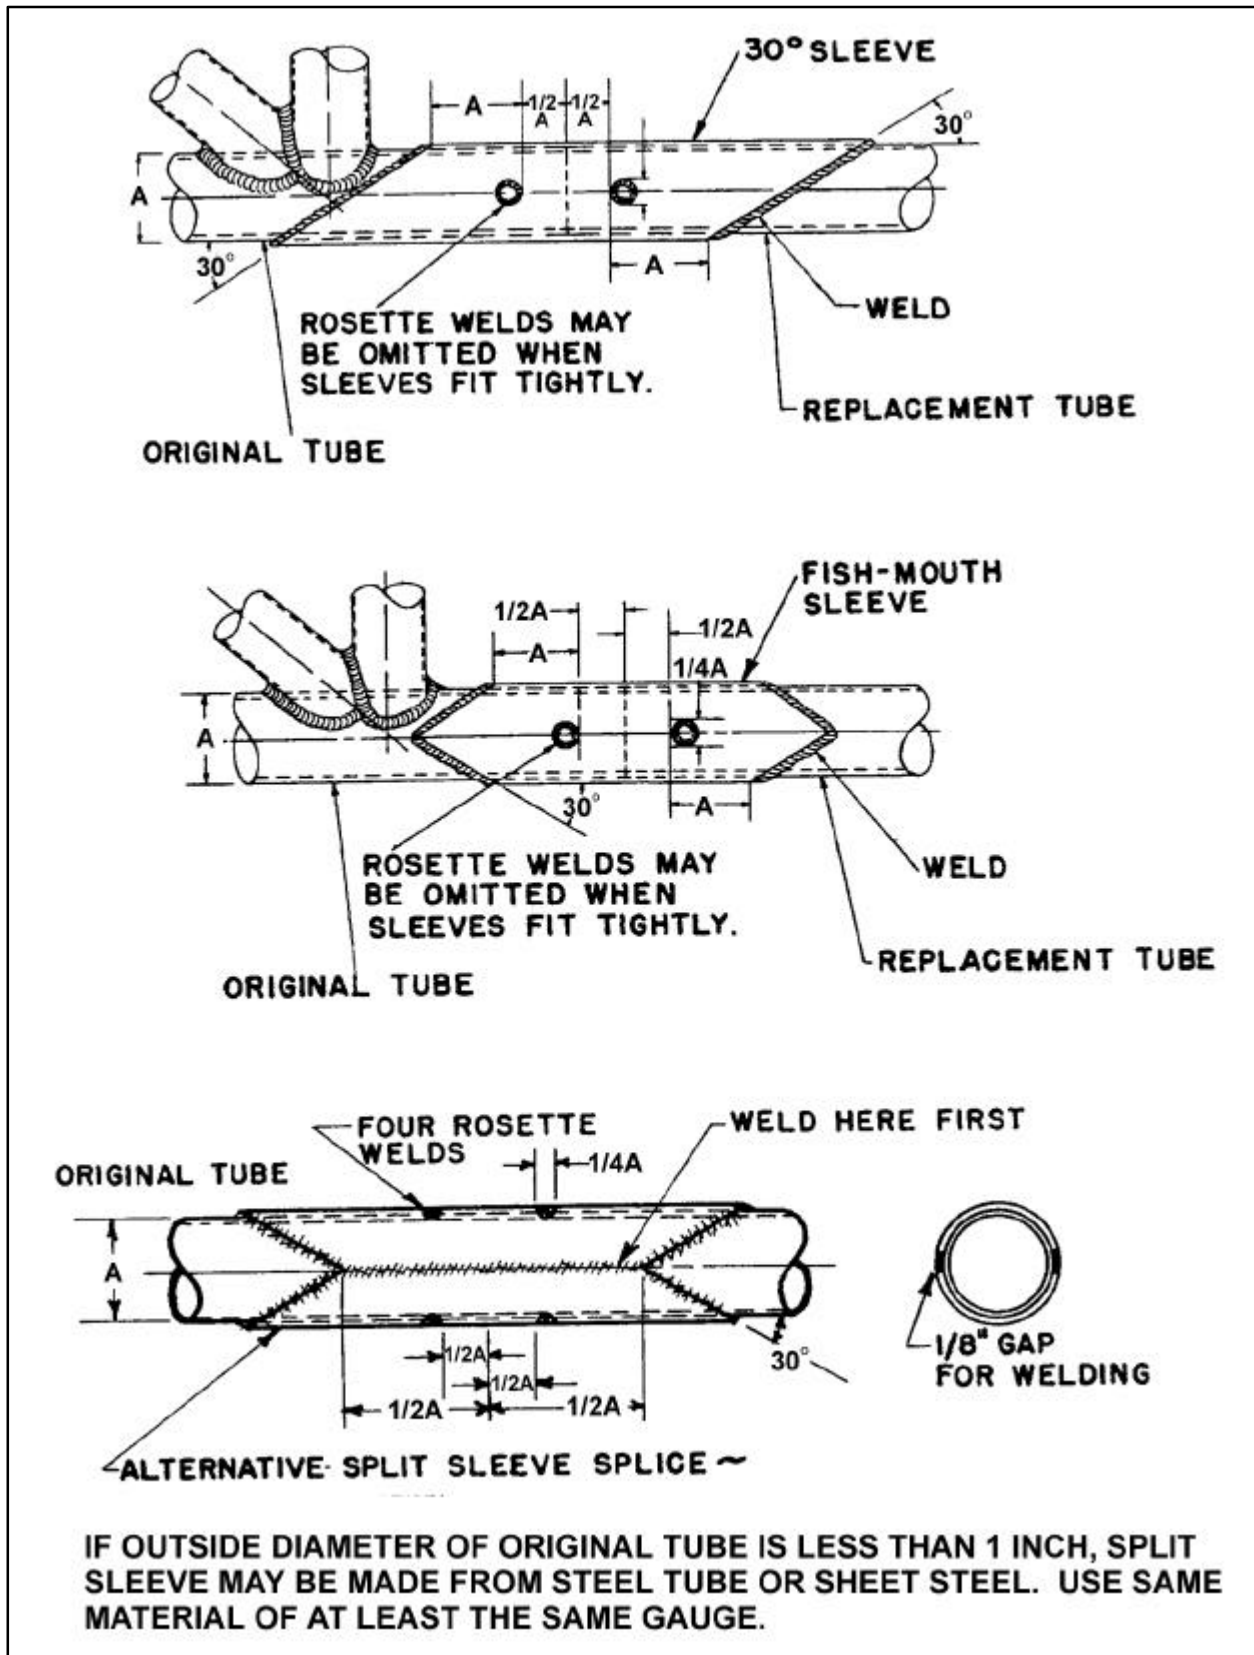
Splicing by outer-sleeve method (replacement by welded outside sleeve).
